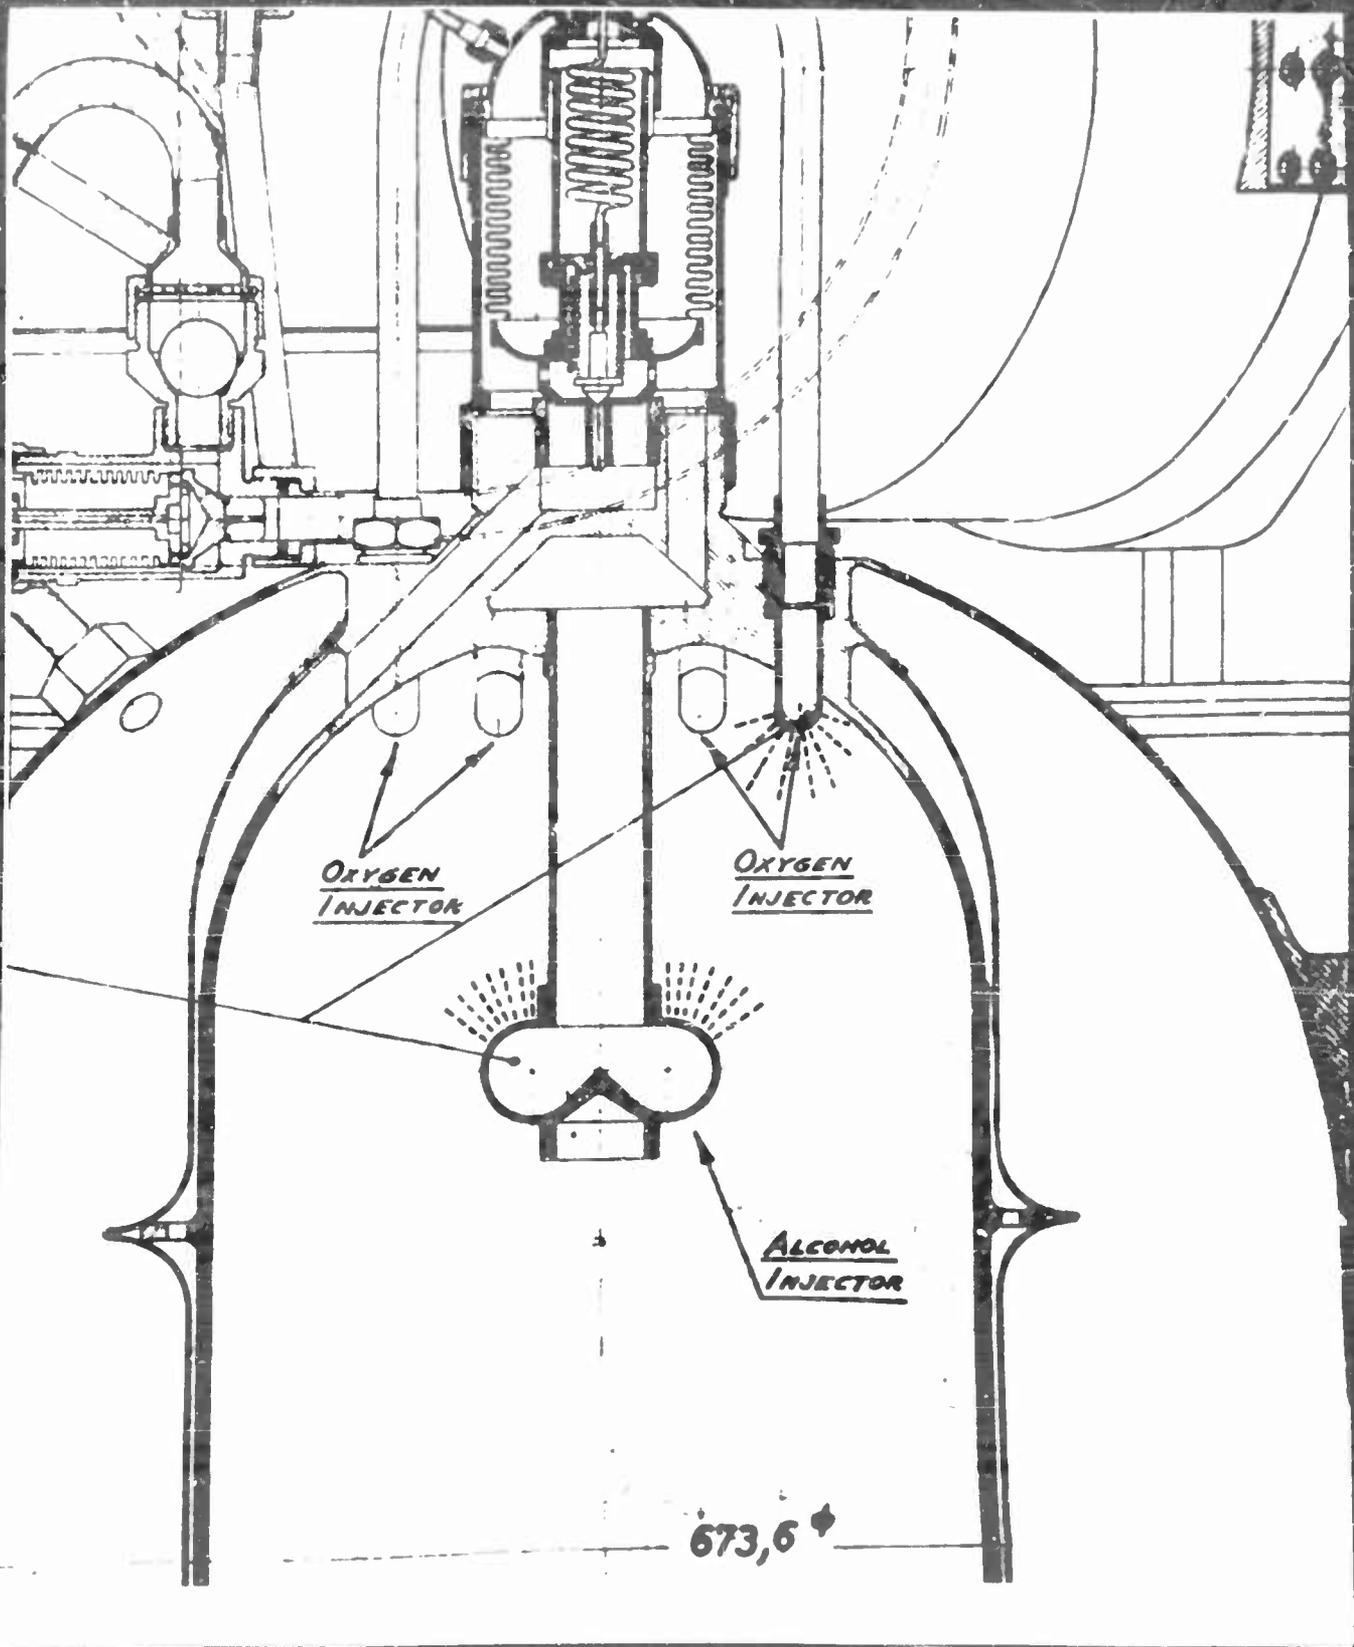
E - Section of A-3 Engine Showing Injector Detail
